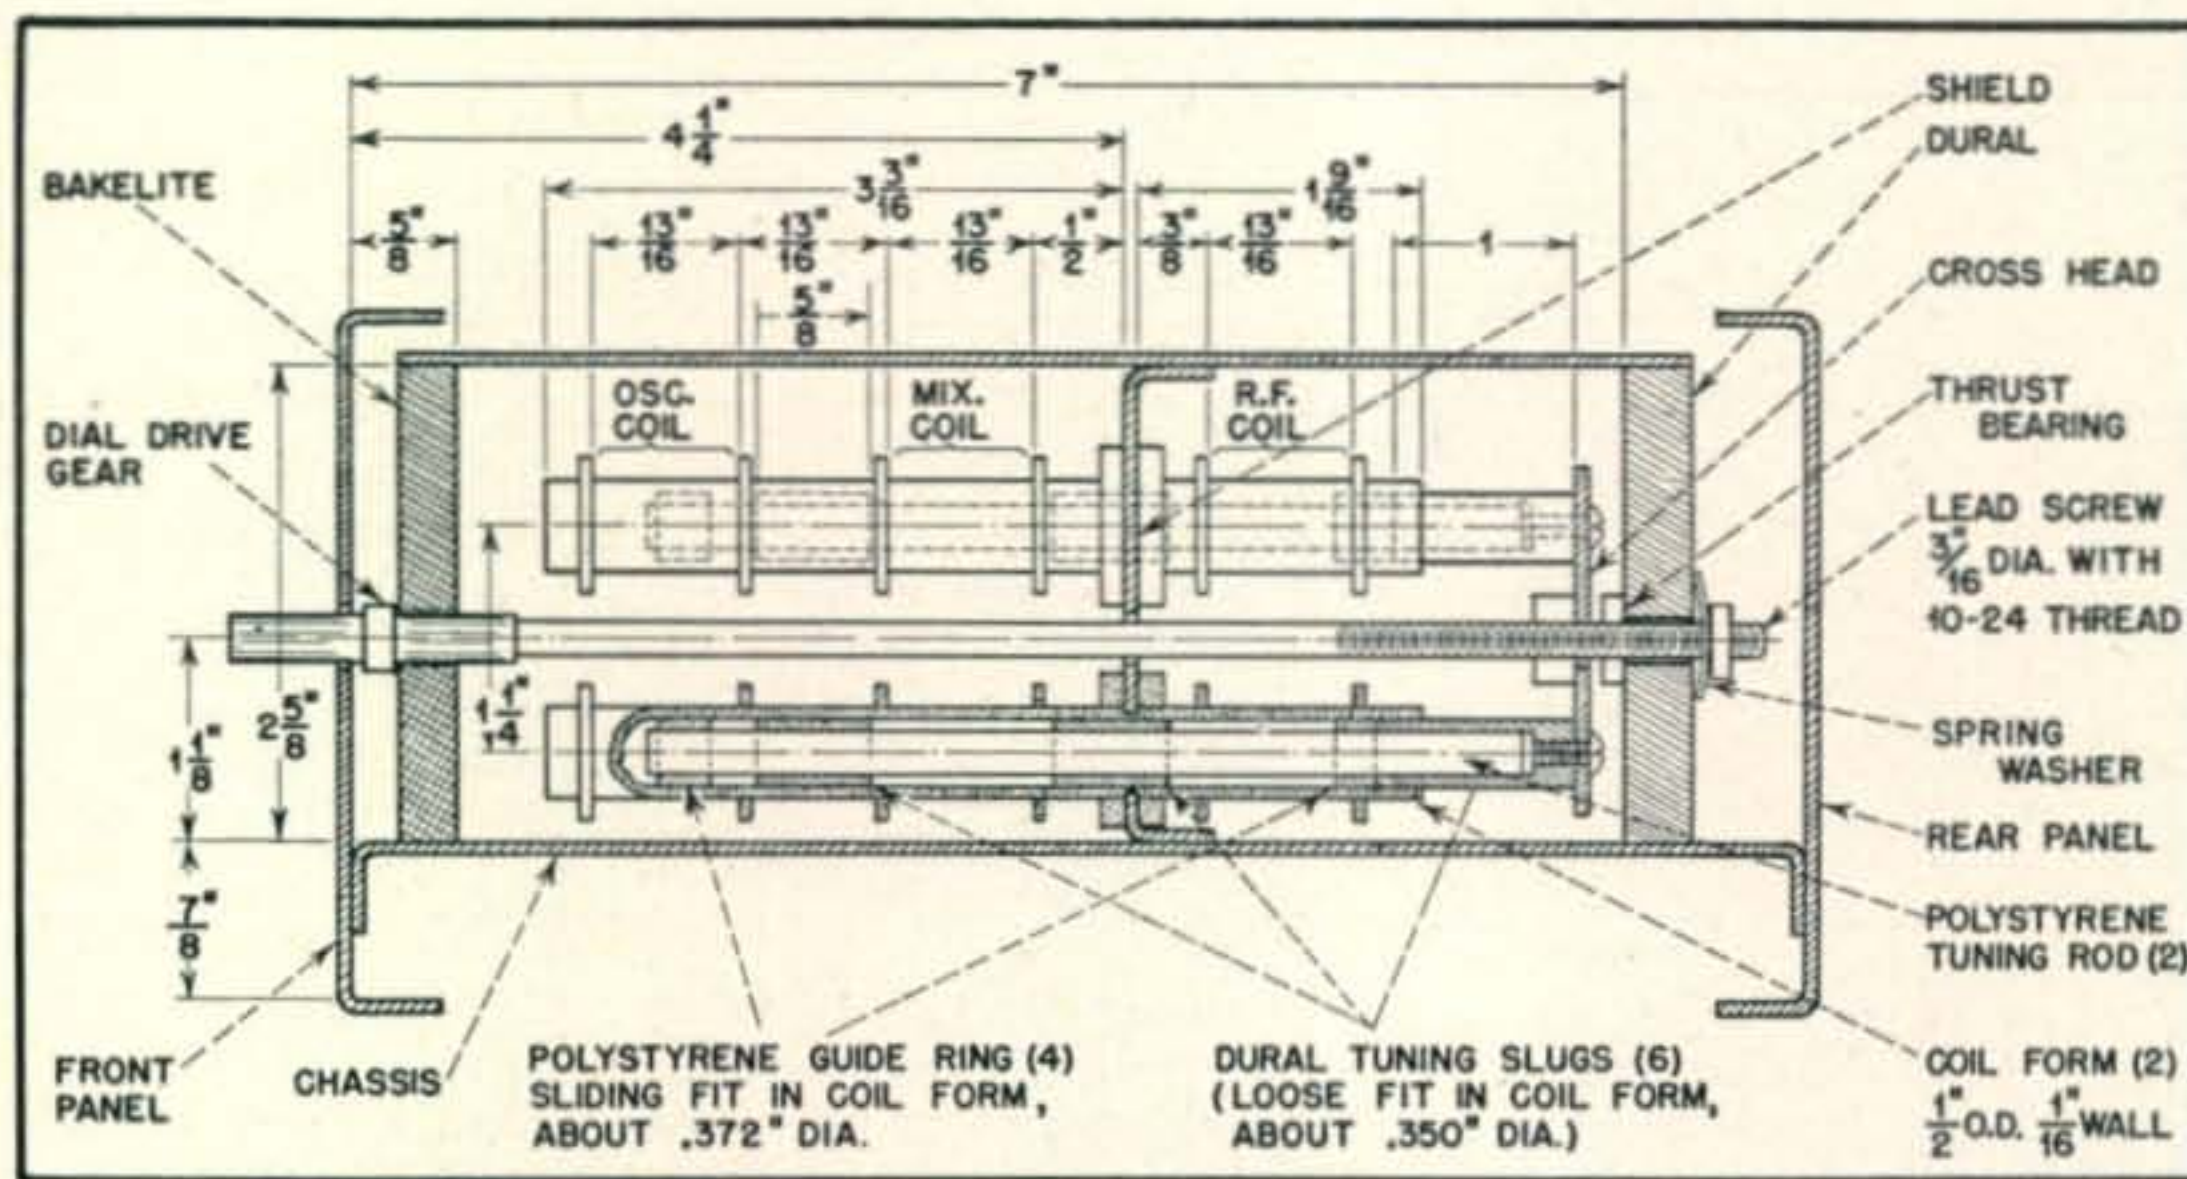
Part cross-sectional view of complete tuning mechanism.
